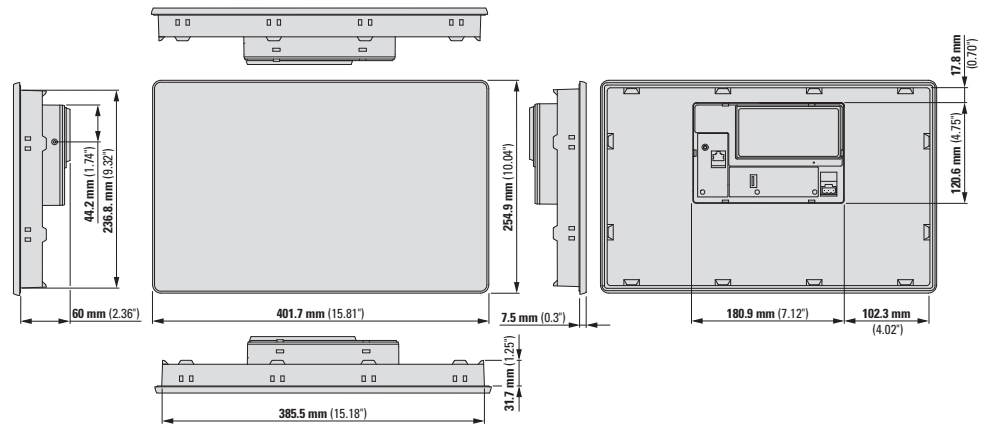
Dimensions for 15.6" front mounting devices in mm (inches)
